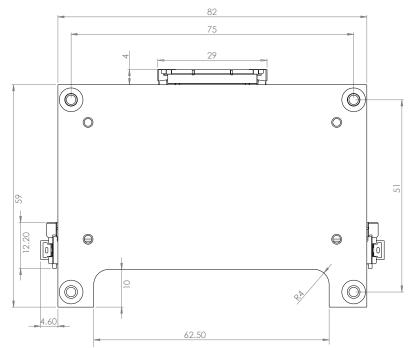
Maximum carrier board space requirement (dimensions in mm)
